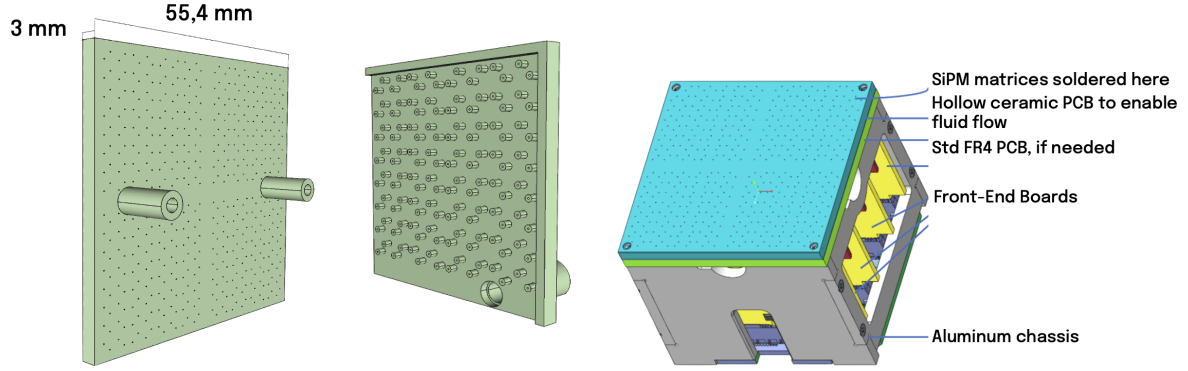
Prototype of the SiPM-based Elementary Cell. Left: baseboard concept based on a hollow ceramic PCB with embedded cooling channels. Right: layout of the modular photodetector unit integrating SiPM matrices, mechanical housing, and readout interface.
